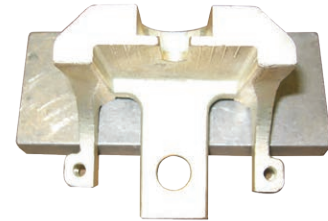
400A Load Side Terminal for Bolt-in Contactor
